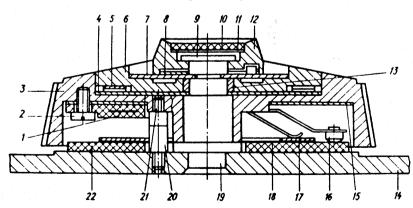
Viewfinder calculator: 1 — plate (contact) 6.614.079; 2 — screw 8.902.000; 3 — scale 7.021.160; 4 — gasket 8.618.77; 5 — washer 8.943.011; 6 — scale 6.050.637; 7 — scale 6.050.638; 8 — washer 8.913.114; 9 — axle-screw 8.318.526; 10 — facing 8.645.656; 11 — gasket 8.681.097; 12 — hand wheel 8.330.379; 13 — ring 9.137.624; 14 — cashing 6.430.385; 15 — gasket 7.841.170; 16 — contact 7.732.491; 17 — disk 7.723.035; 18 — gasket 7.814.296; 19 — axle 3.314.886; 20 — screw 8.909.431; 21 — screw 8.909.589; 22 — washer 7.723.015
